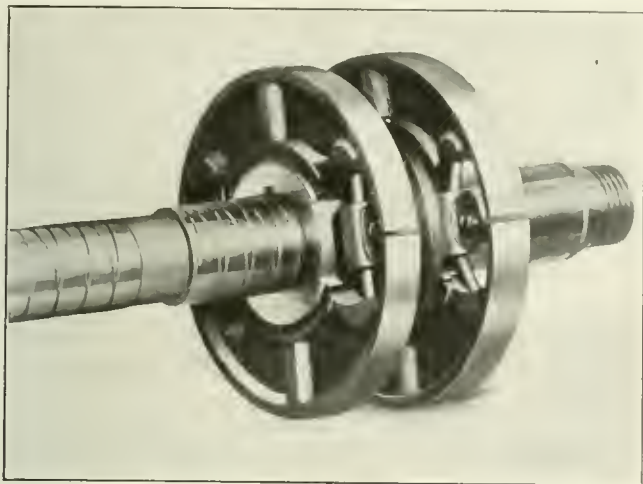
Friction Driving Device used on the Springfield 18-inch Ideal Lathe
